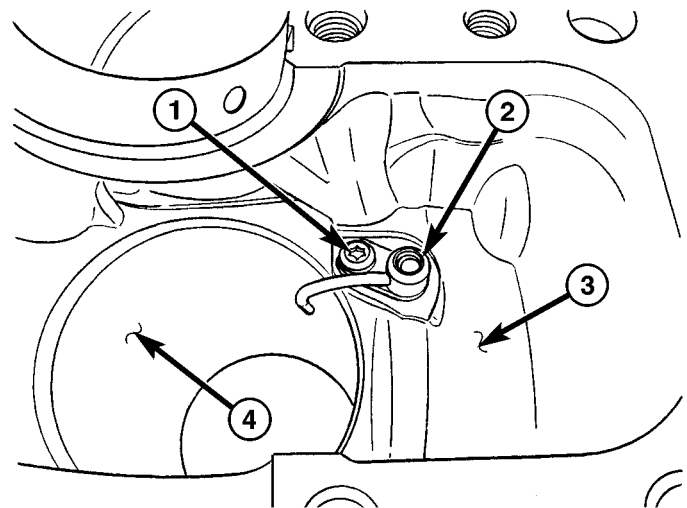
Oil Jet Fastener - 2.4L Turbo
